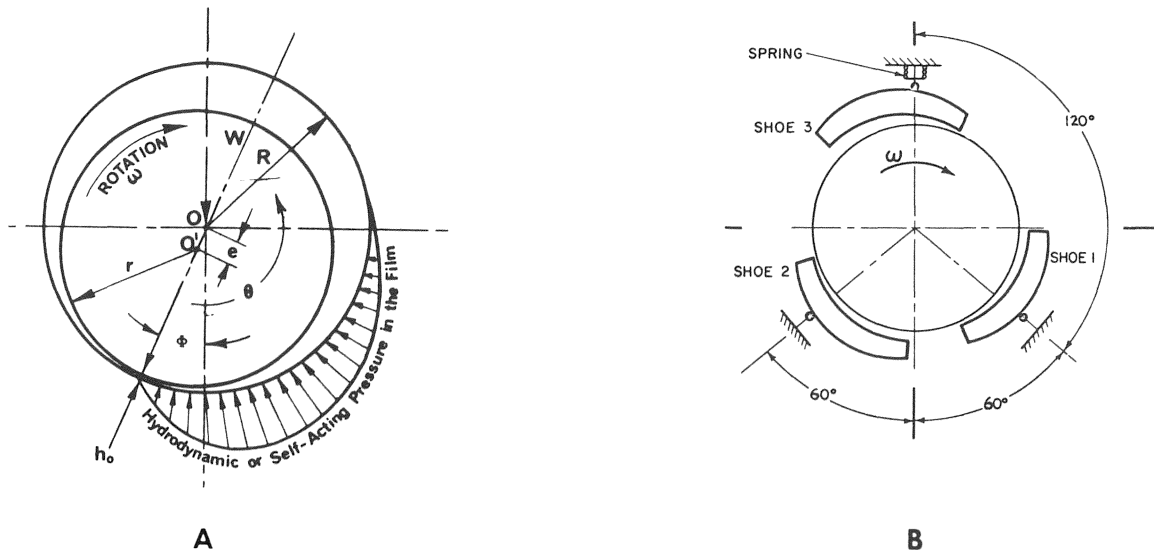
(a) Sleeve Type Journal Bearing; (b) Tilting-pad Journal Bearing.
